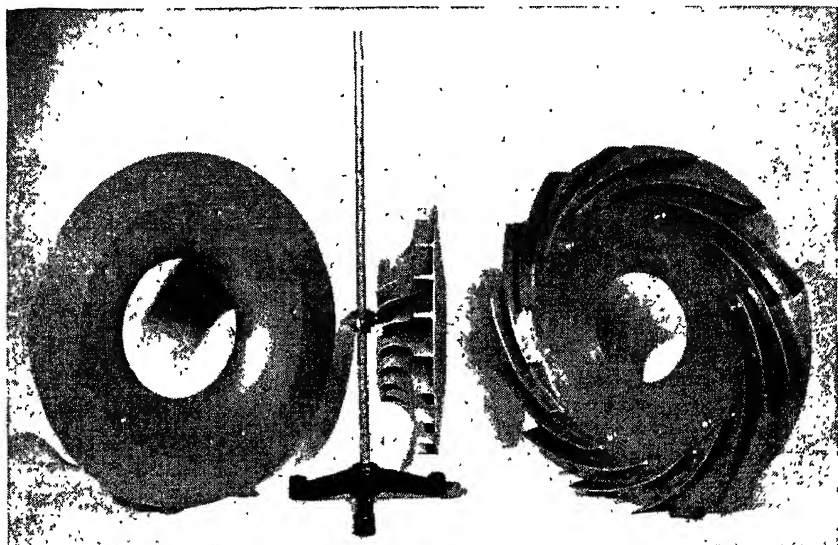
Supercharger impeller and diffuser. (Wright Aeronautical Corp.)
